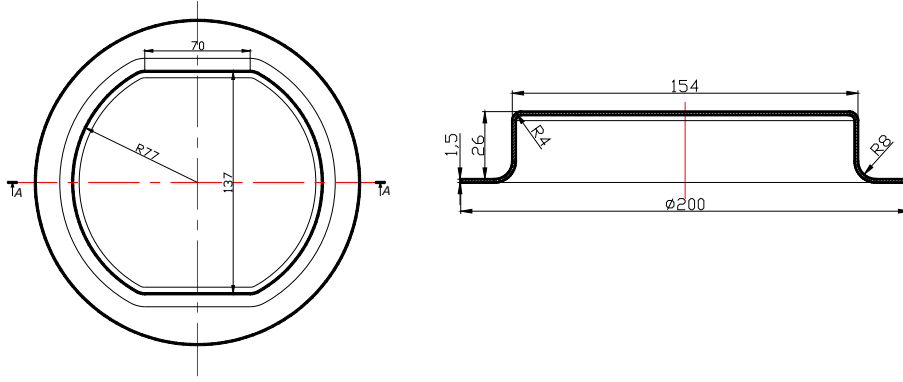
Test piece with flat sides and key dimensions (unit: mm) [51]
